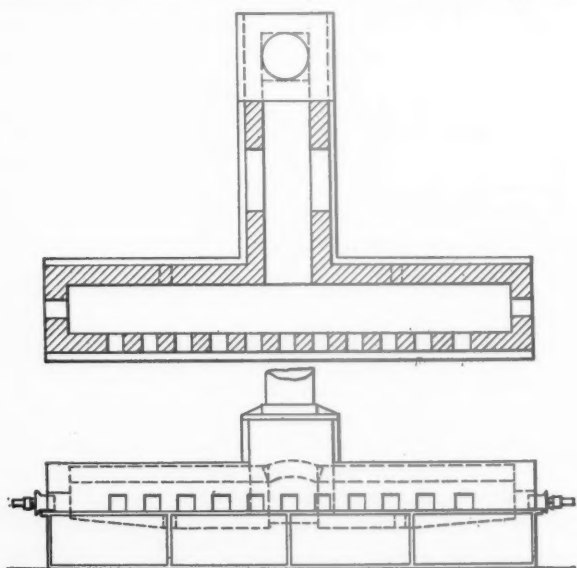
Powdered coal furnace for 5-in. Ajax forging machines
